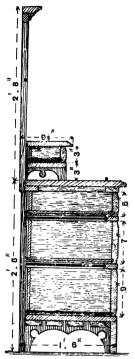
Vertical Cross Section of Modern Dressingchest.
